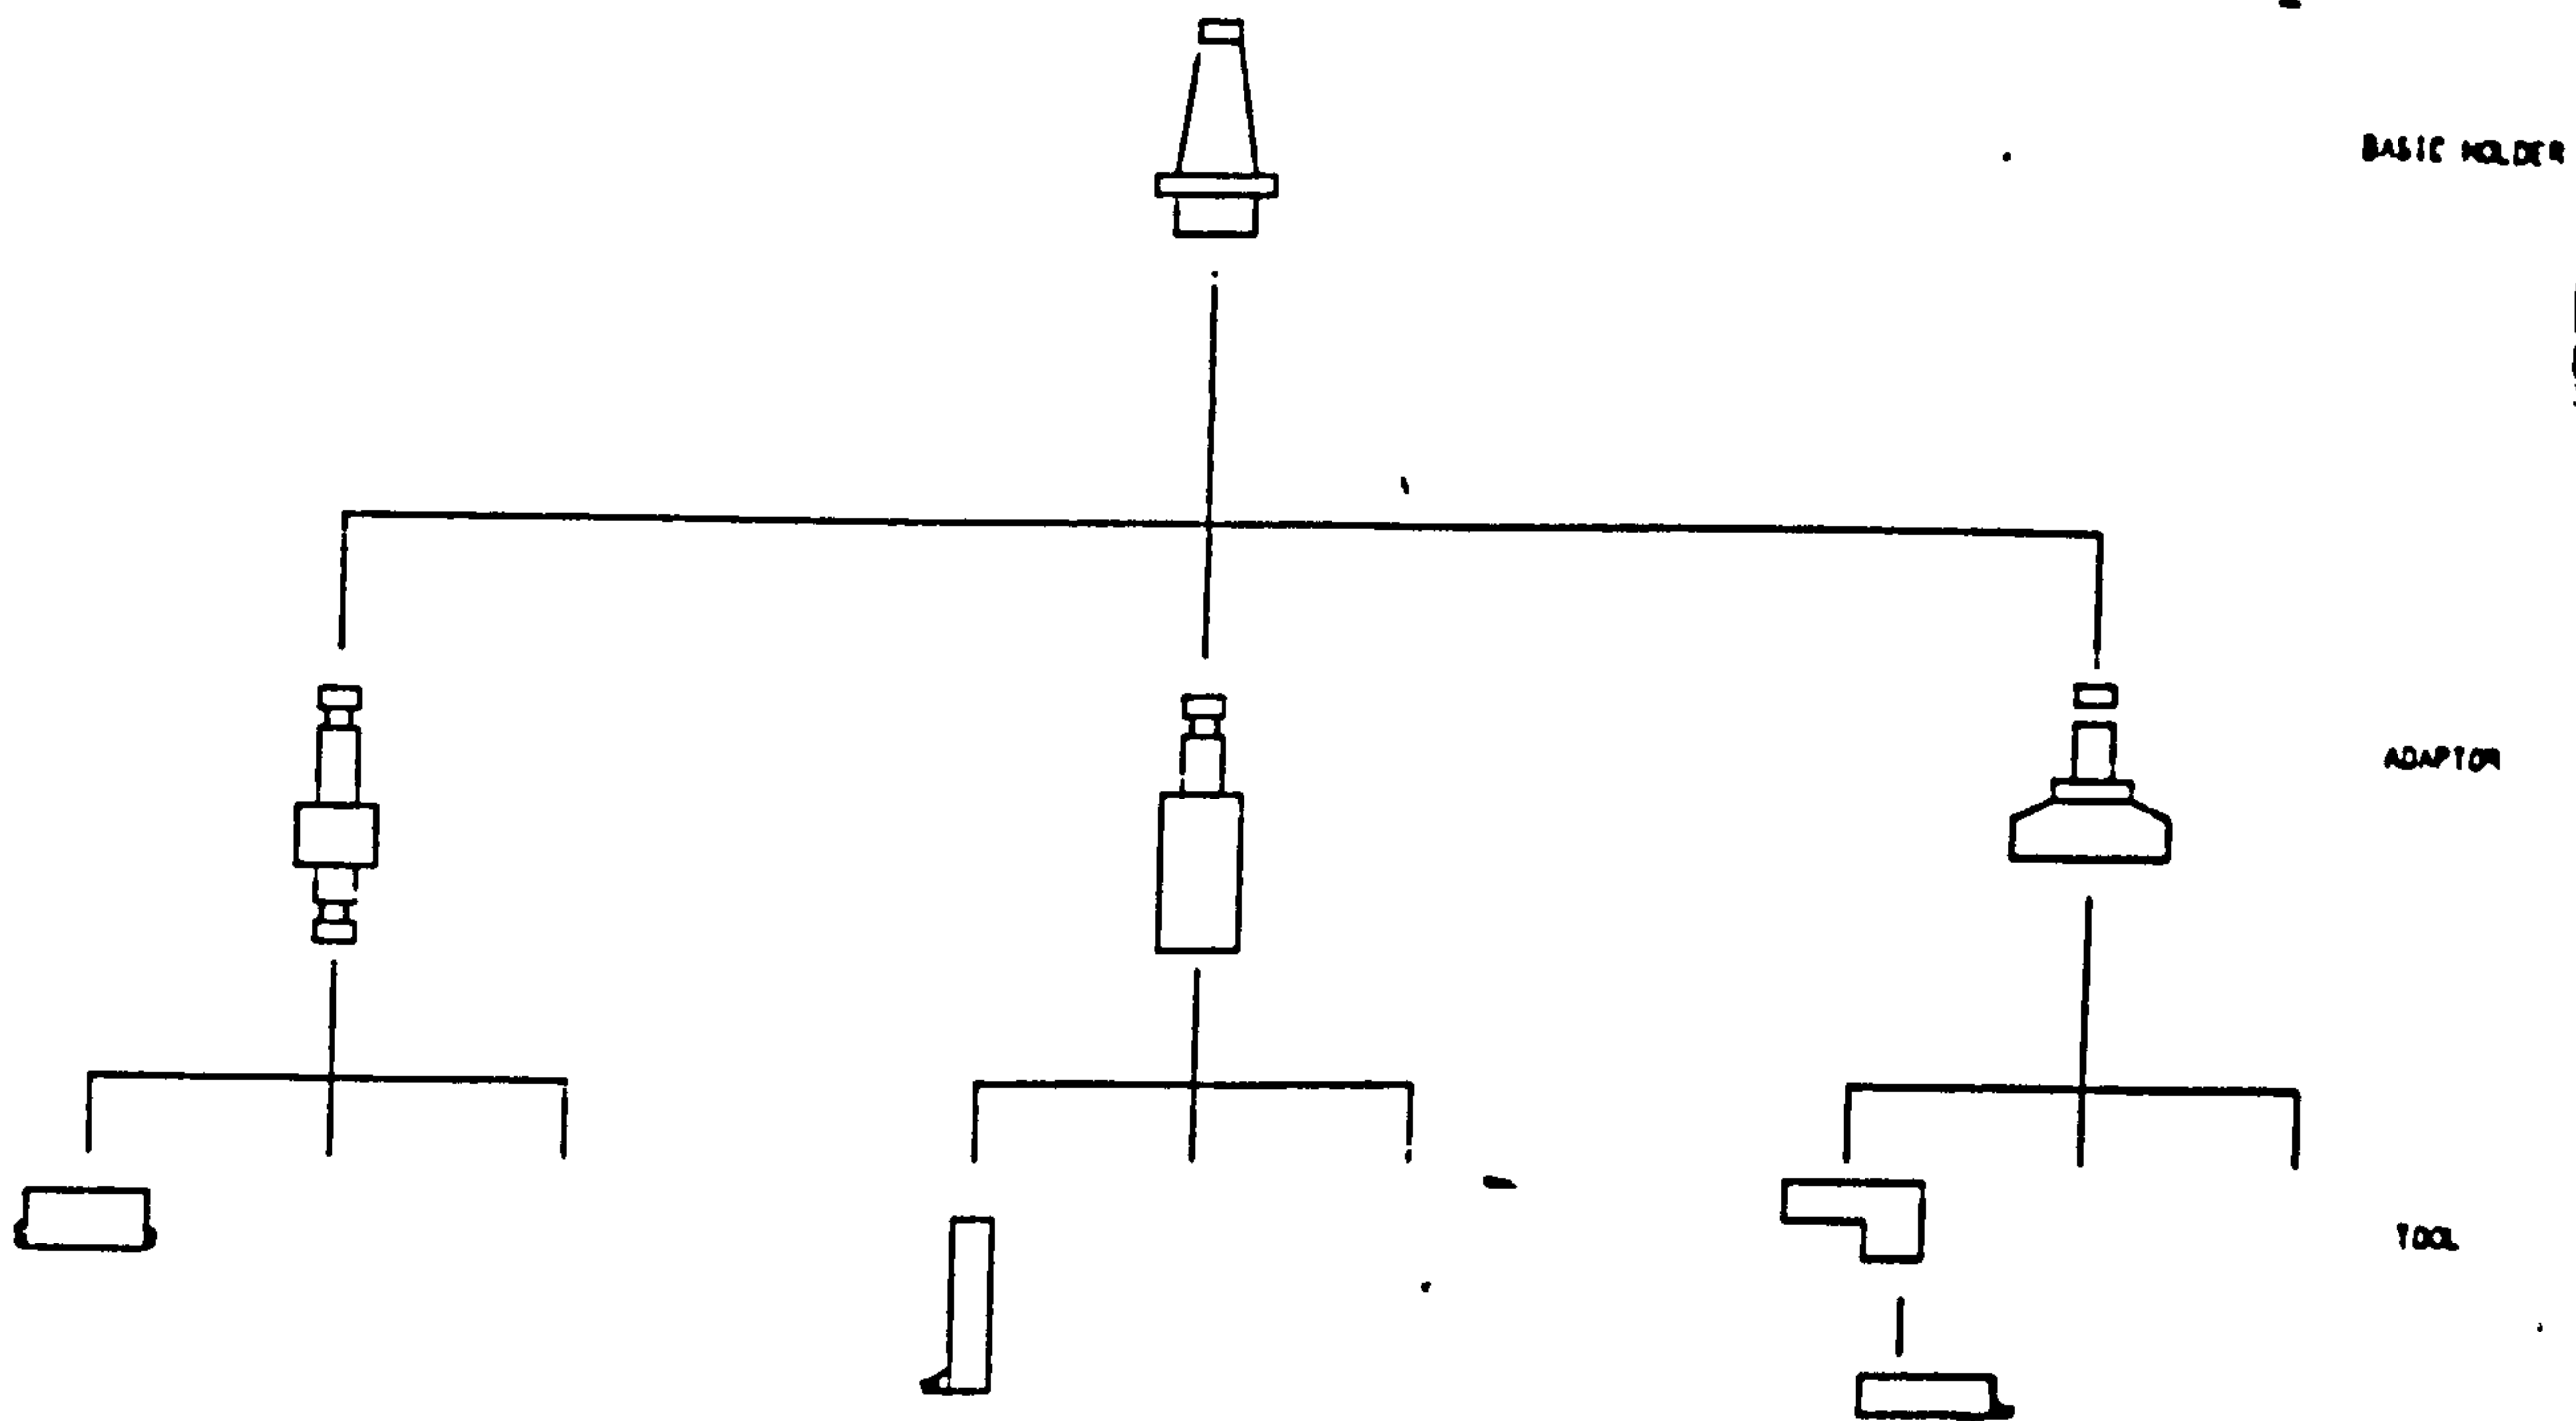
A TOOL SYSTEM FOR NC MACHINING CENTRES
